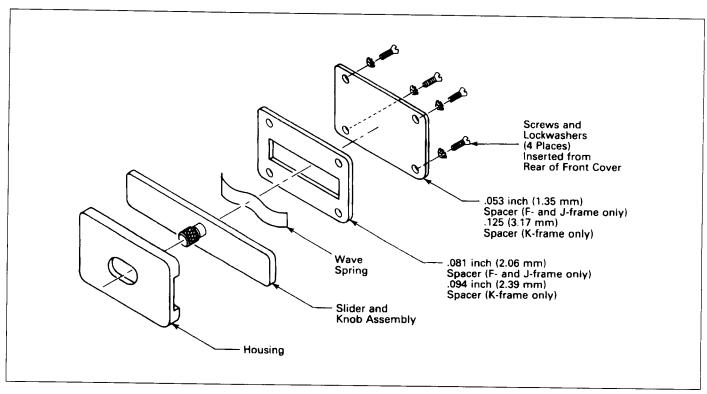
Assembly Sequence of Sliding Bar Interlock Components
